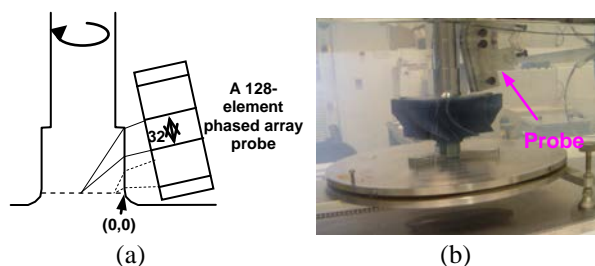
(a) Schematic and (b) photograph of an ultrasonic system to detect welding cracks.
